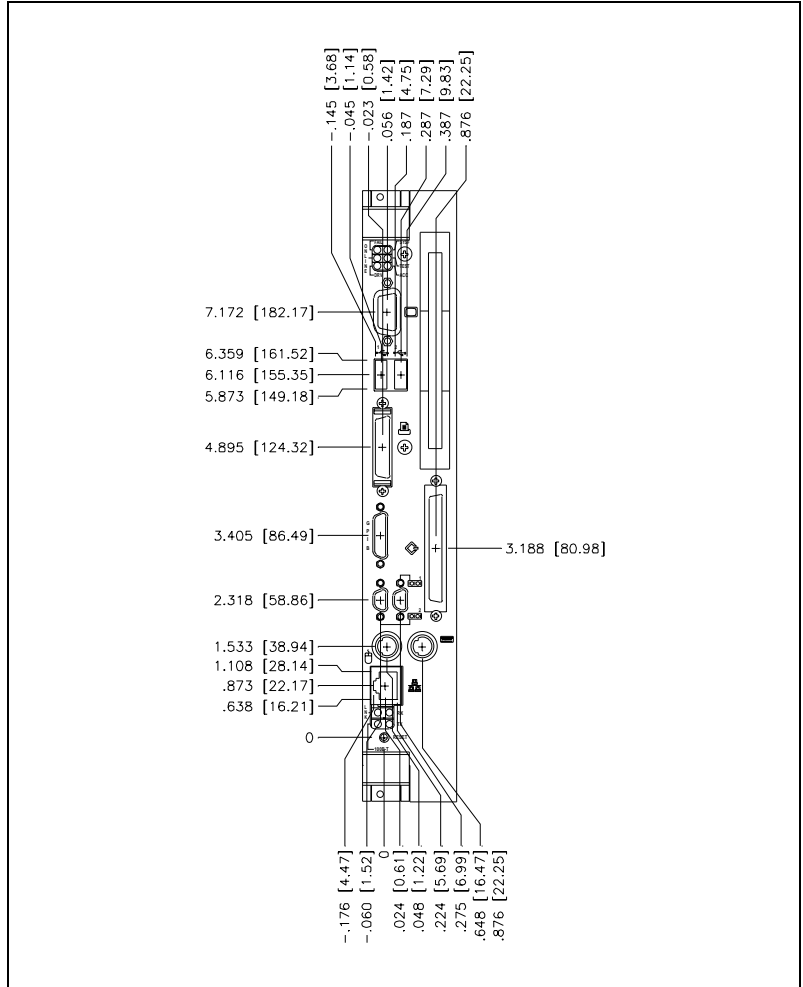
VMEpc-650 Front Panel Layout and Dimensions
